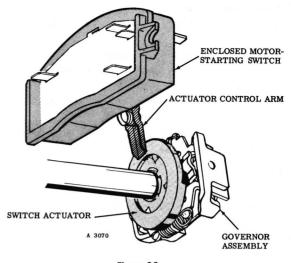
Positioning of Switch Arm DISCHARGE PUMP HOSES SMALL PUMP COVER
